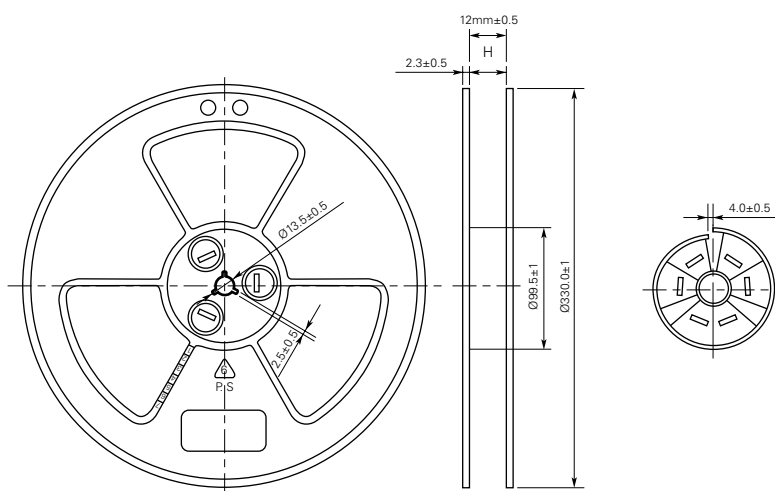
Reel Dimensions for ZENxxxVyyyAzzYC Devices in Millimeters (mm)
